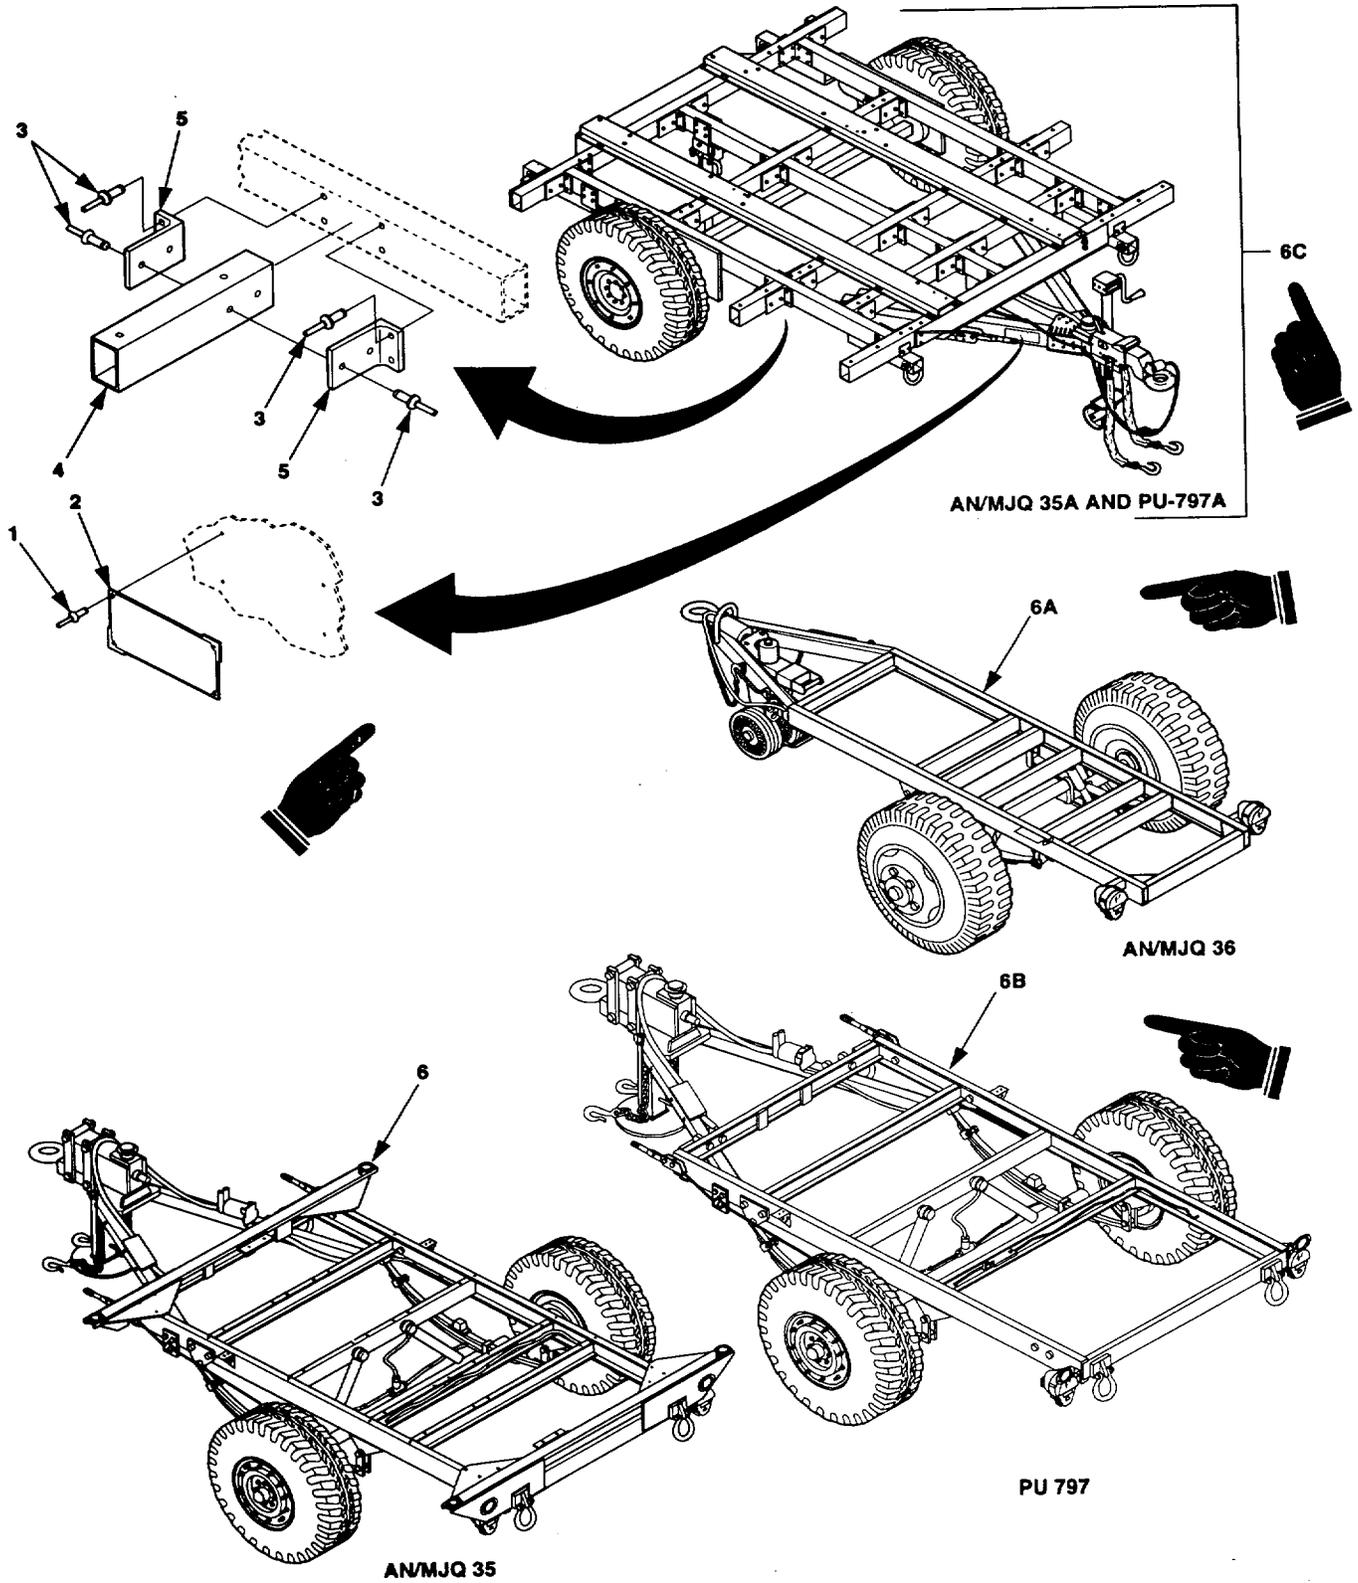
Power Plant/Power Unit Trailer Chassis Assembly.
